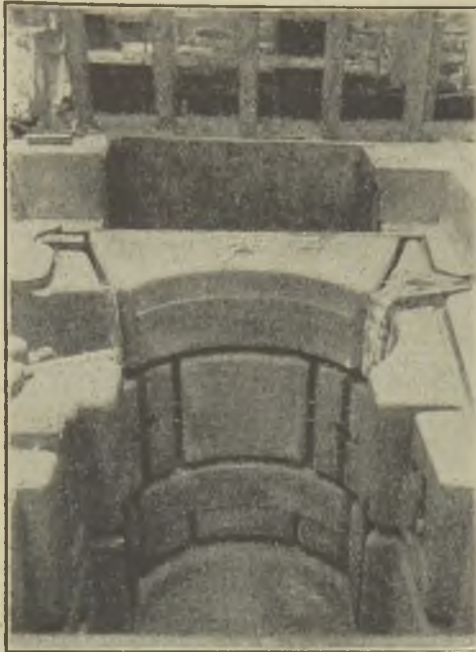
M.P. CYLINDER MOULD SHOWING THE BLANK CHEST WITH CHILL MARKED IN WHITE.
